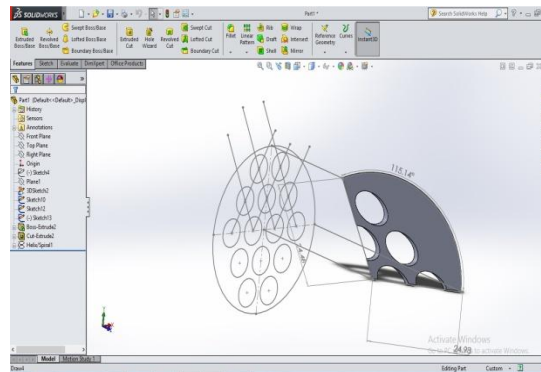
Polycarbonate sheet and stainless steel Tubes
